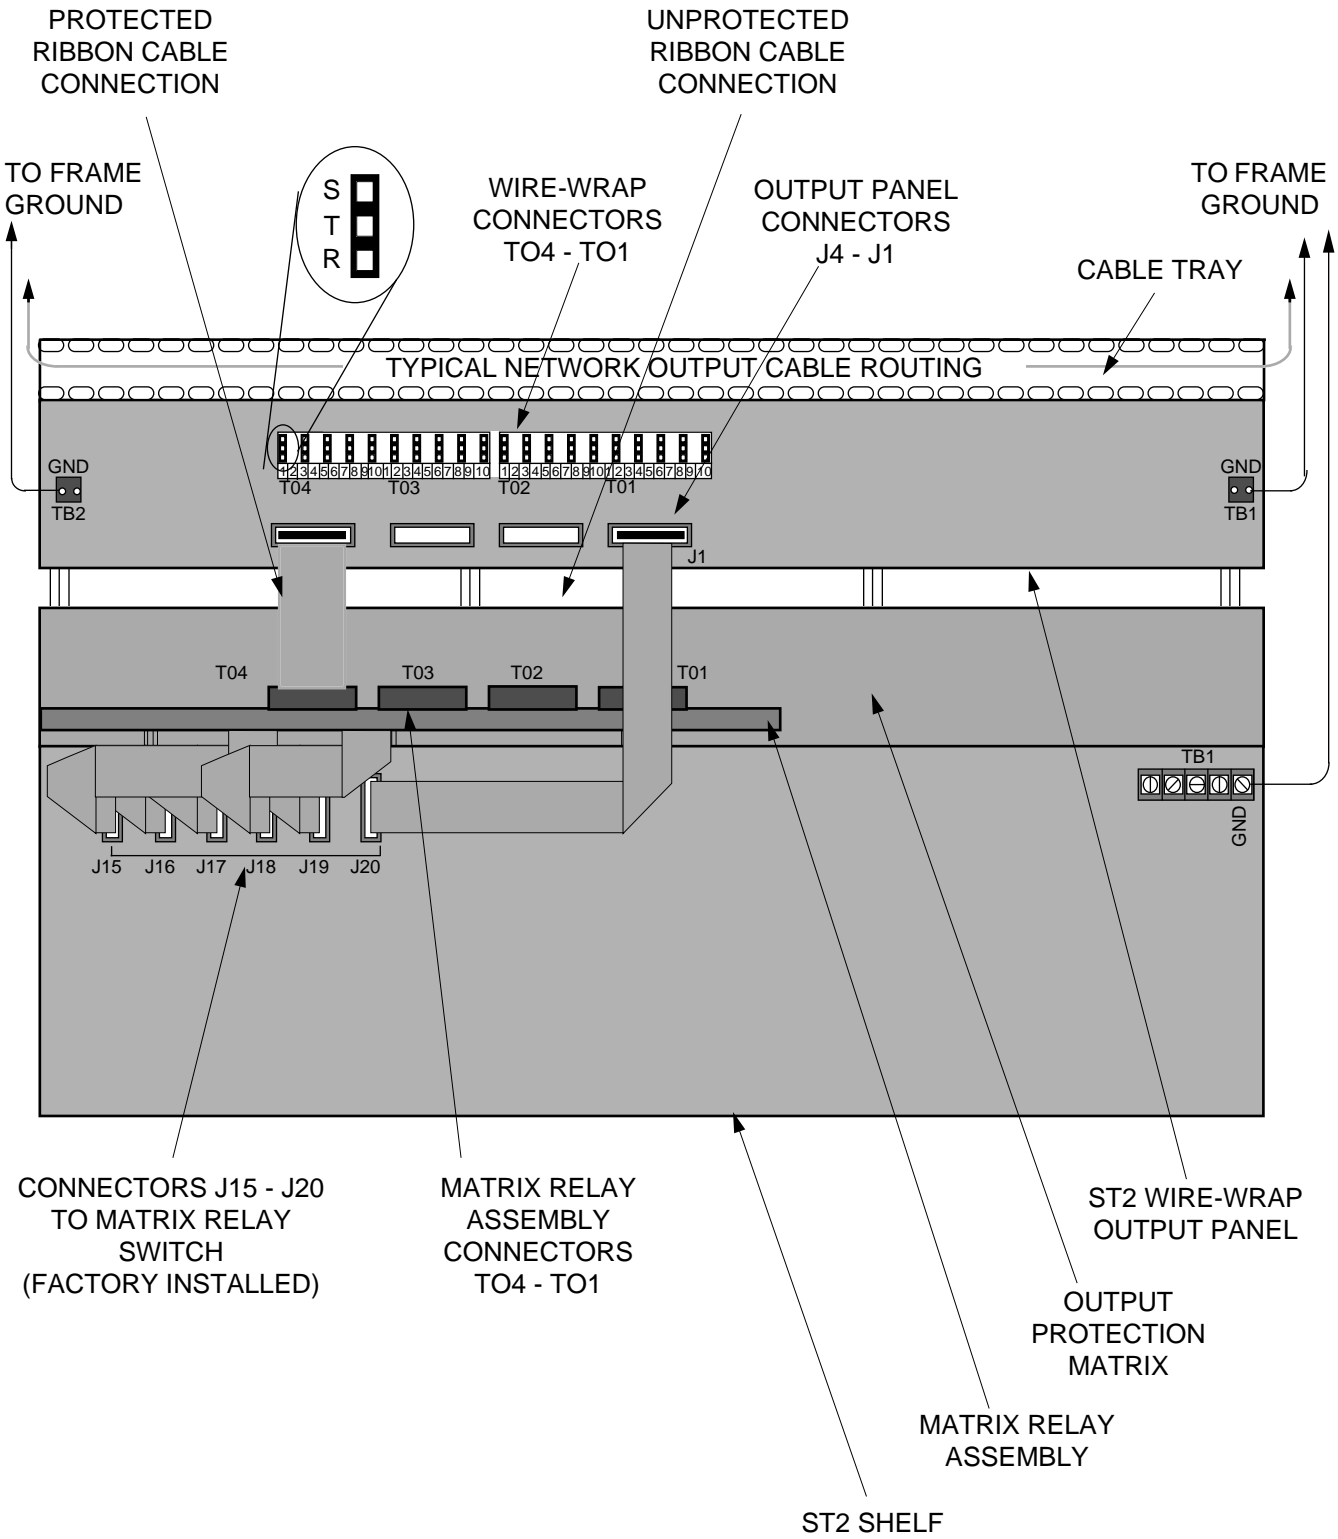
ST2 Wire-wrap Output Panel Cabling (Rear View)
